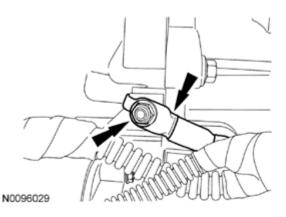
Locating Ground Wire And Starter Motor Stud Bolt Courtesy of FORD MOTOR CO.
